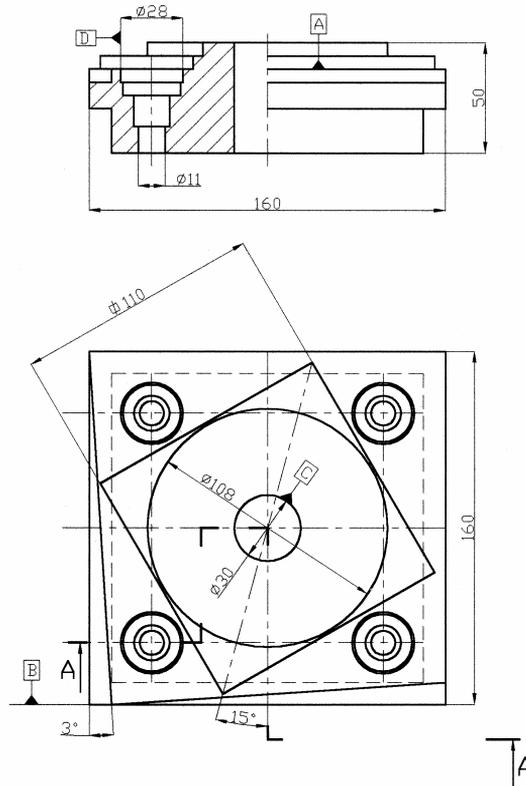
The structural form and the main dimensions of the test piece for testing the milling machining centres accuracy with marked processing bases
